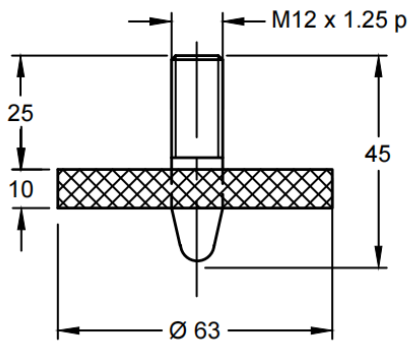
GENERAL ASSEMBLY FOR ANALOGUE TYPE EQUIPMENT
